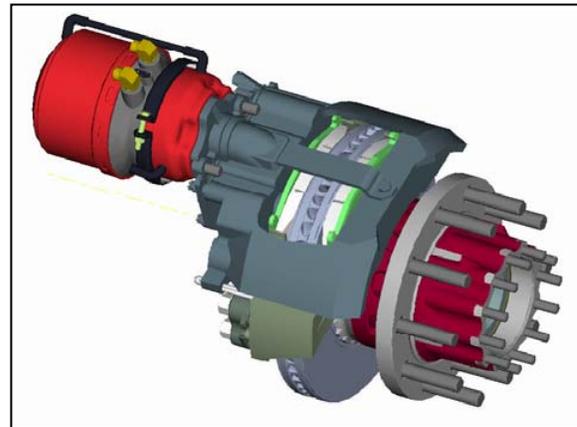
Air Disc Brake (ADB) and Hub Assembly.
